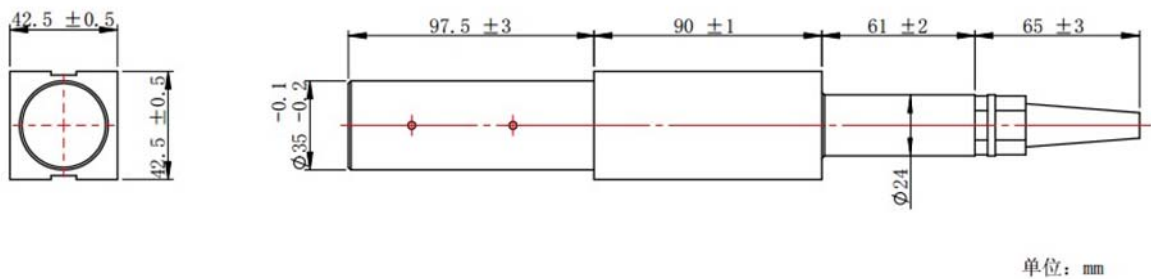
Mechanical Dimensions of the fiber laser module (Unit: mm)
